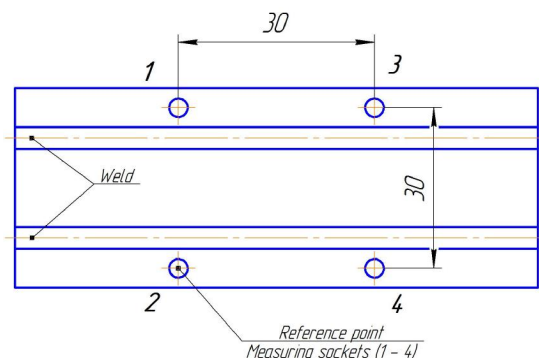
Measuring socket for determining the final residual transverse deformation of the welding zone by two seams of the pipe shells through the compensation ring
